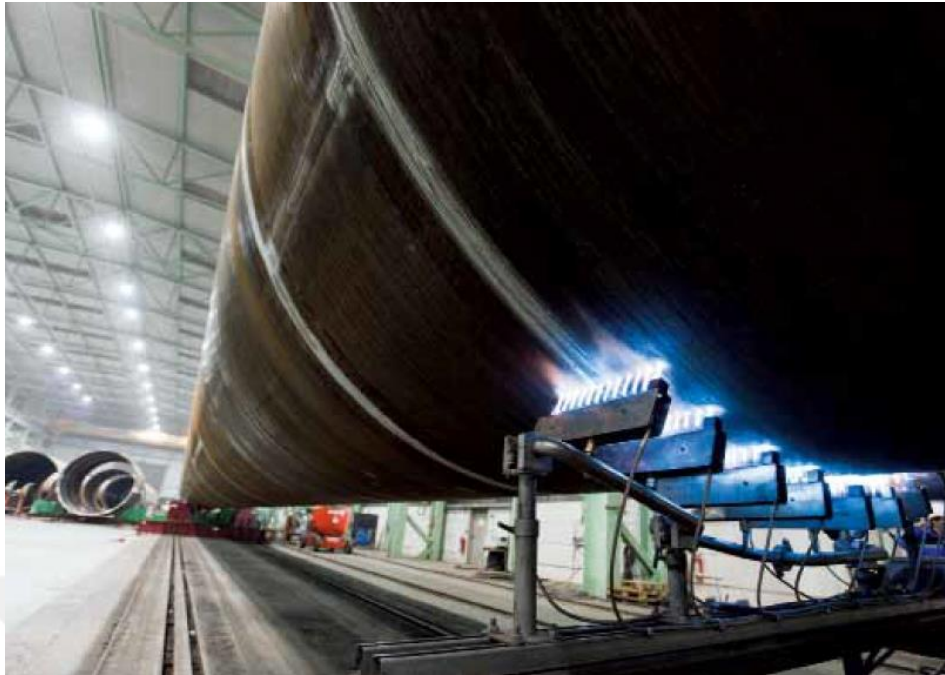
Preheating of special pipes prior to SAW Welding (Ueda and et al., 2012)
